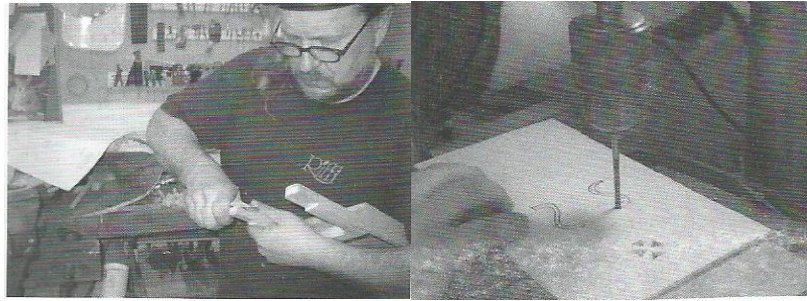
Nieminen inserting the ams (left) and drilling holes for the sound holes (right), pg. 148-149
